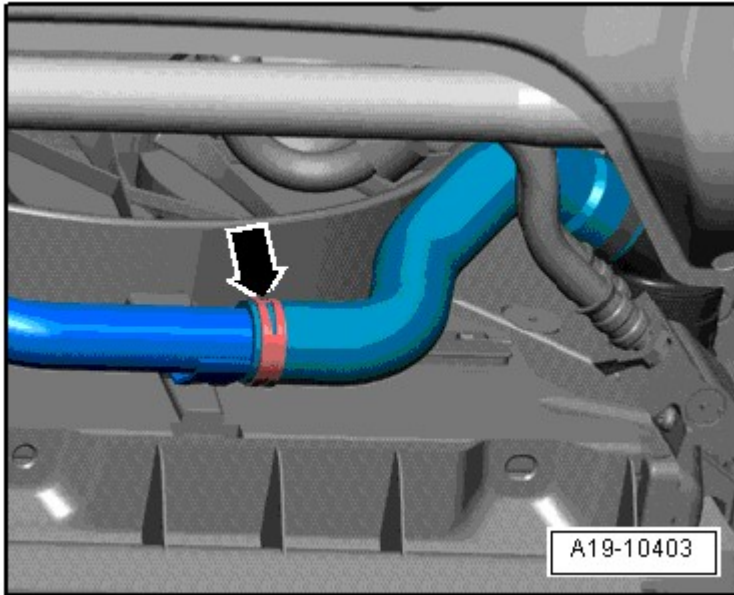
Identifying Coolant Hose To Front Coolant Pipe -Arrow-
